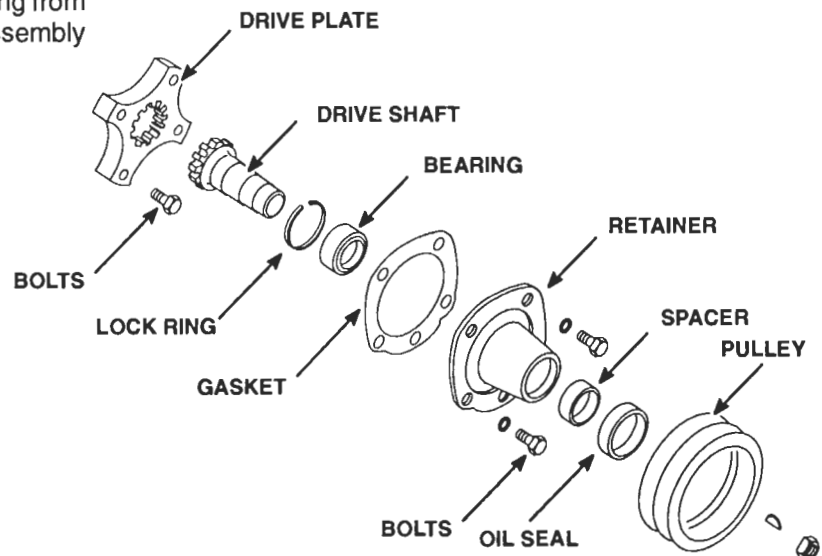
Accessory Drive Components for Belt-Driven Accessory (Drive Plate Type)
